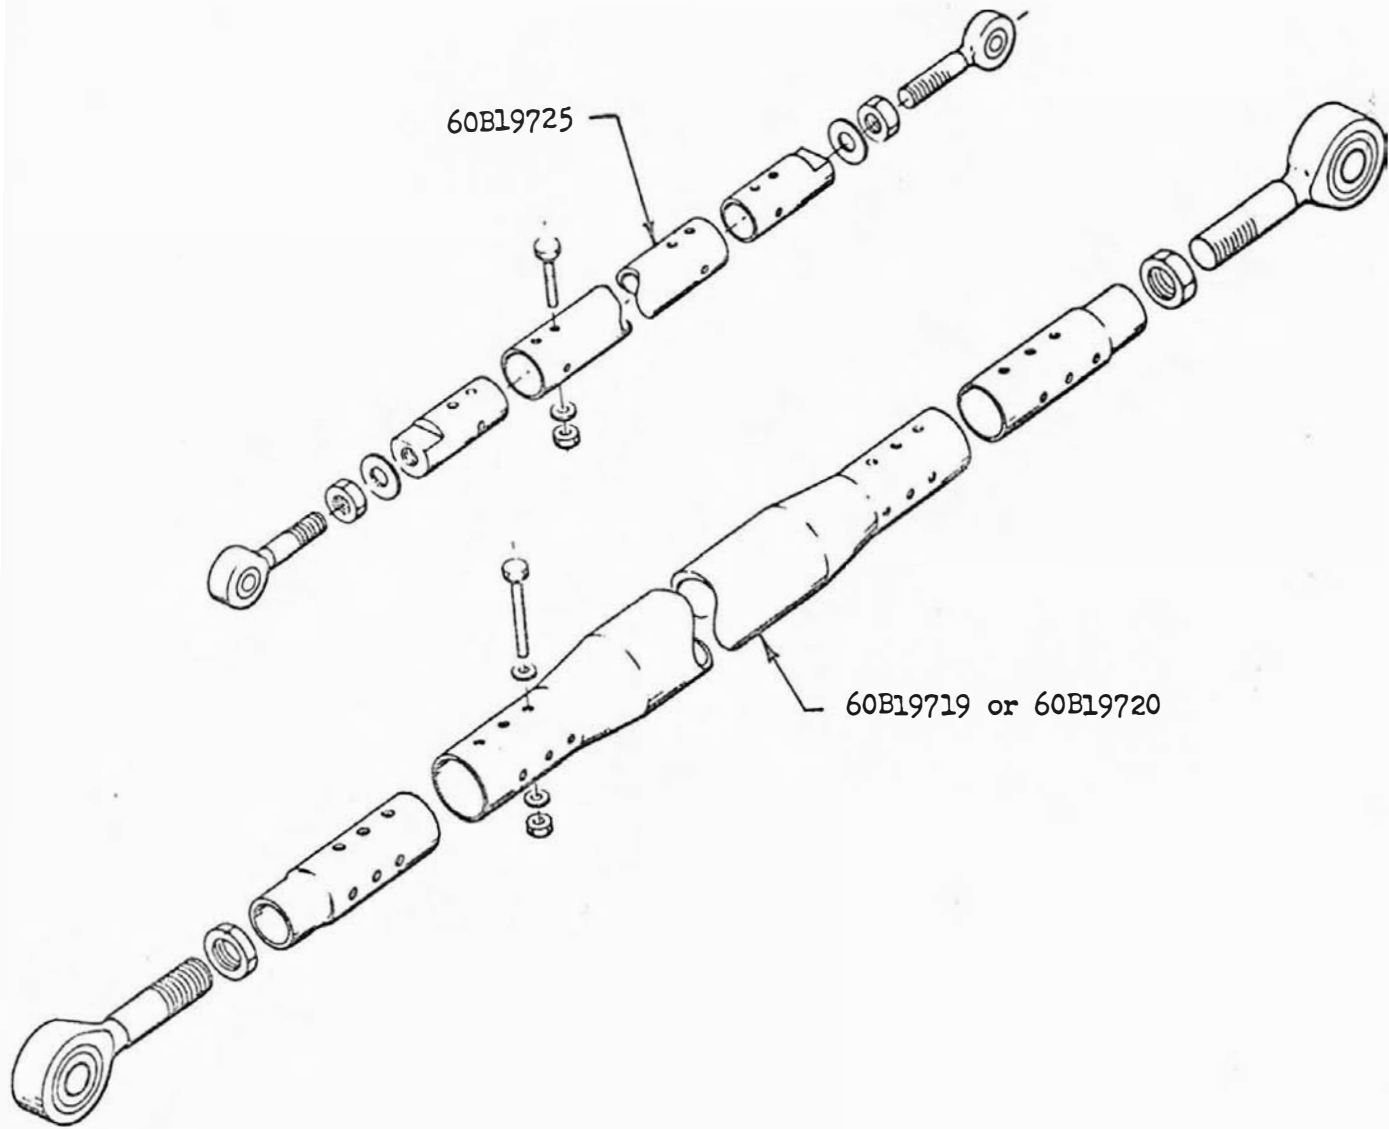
Outboard Propellant Line Support Strut Assemblies
